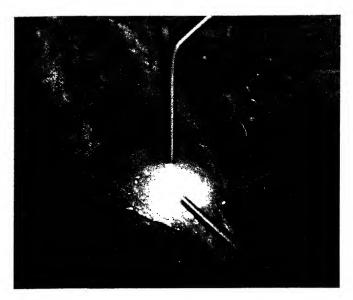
Position of welding rod and blowpipe in neutral flame forehand technique.
